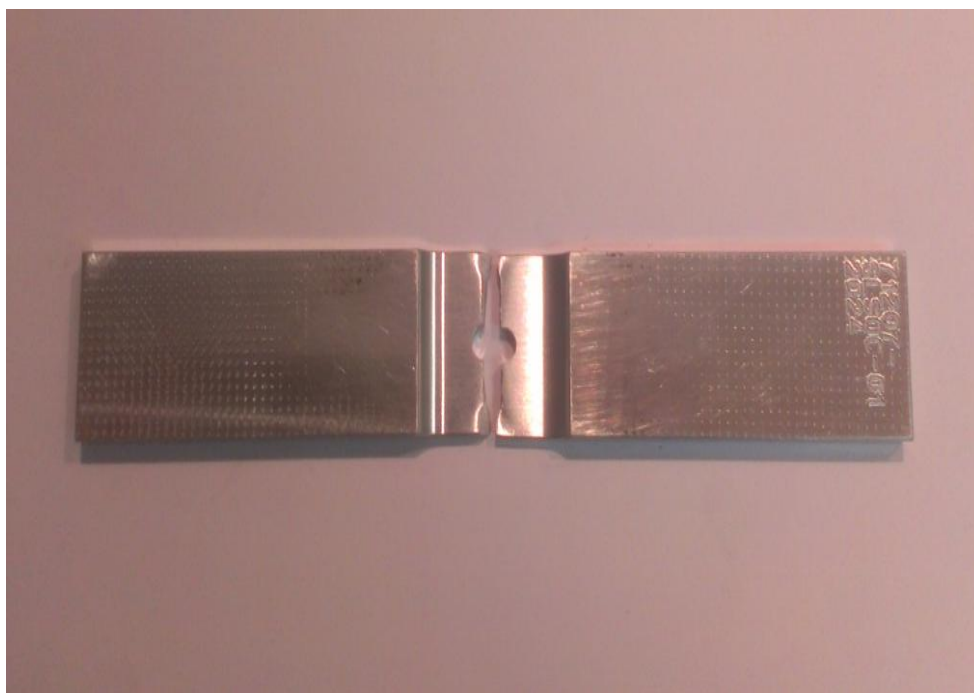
Open Hole in Radius Test Specimen -2 Post-Test Picture
